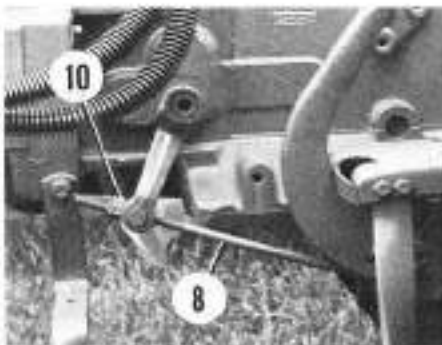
On some tractors, adjust clutch by turning adjusting nut (10). Item (8) is clutch control rod.
